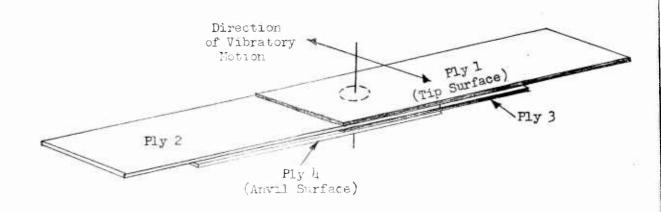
GEOMETRY OF THROUGH-WELDING ASSEMBLY
